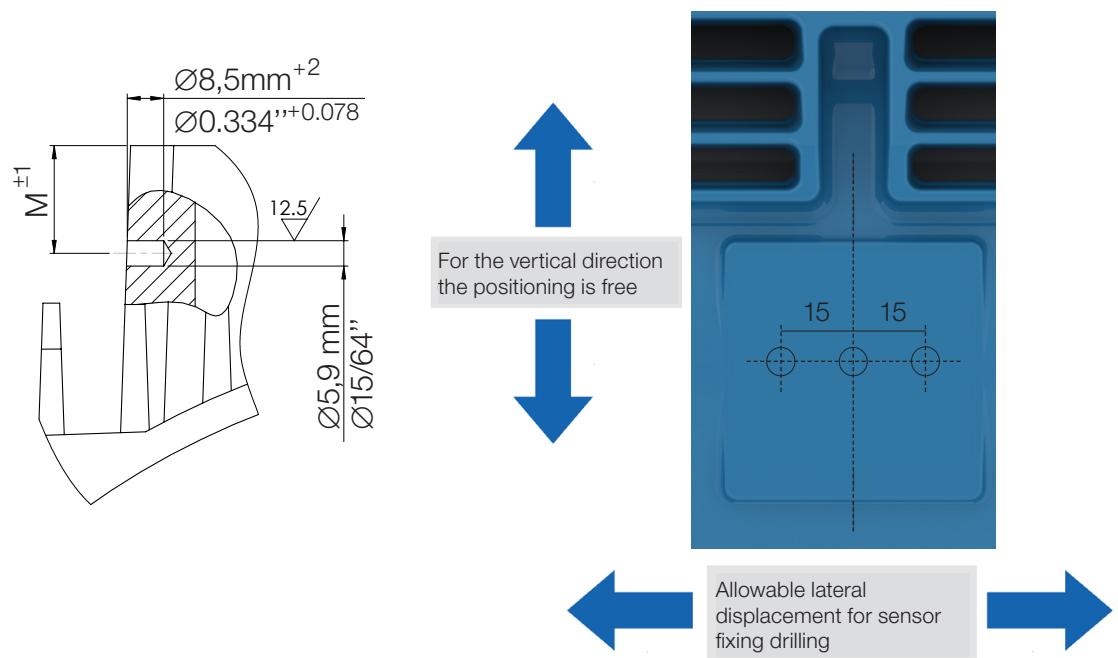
Detail of the drilling for mounting the WEG Motor Scan on the W40 motor
